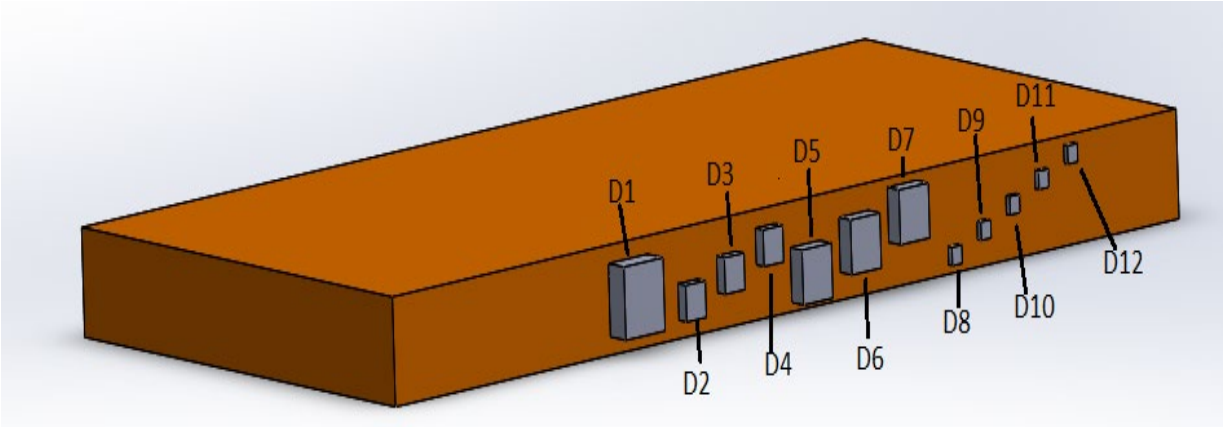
Position of various sized defects at the weld joint region of thick SS plates.
